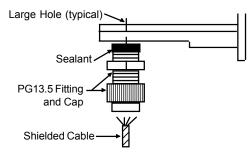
Inserting Shielded Interconnect Cable through PG13.5 Fitting and Cap
